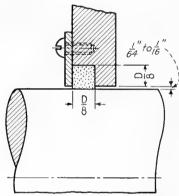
This design makes it easy to replace the cork or felt ring. In some instances, the depth of the counterbore is doubled and two rings are used.
